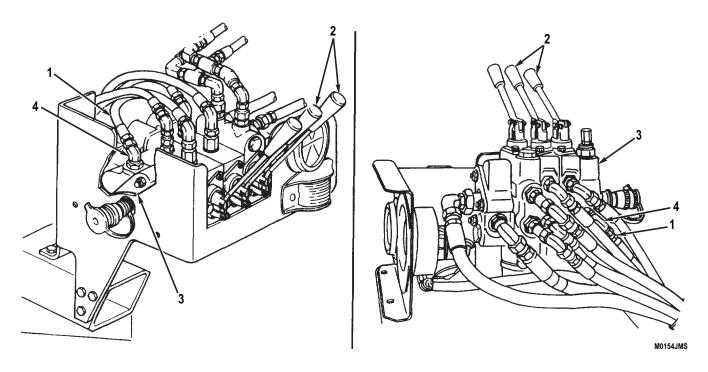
Hydraulic Pump Outlet-to-Hydraulic Control Valve Inlet Hose Connection.
